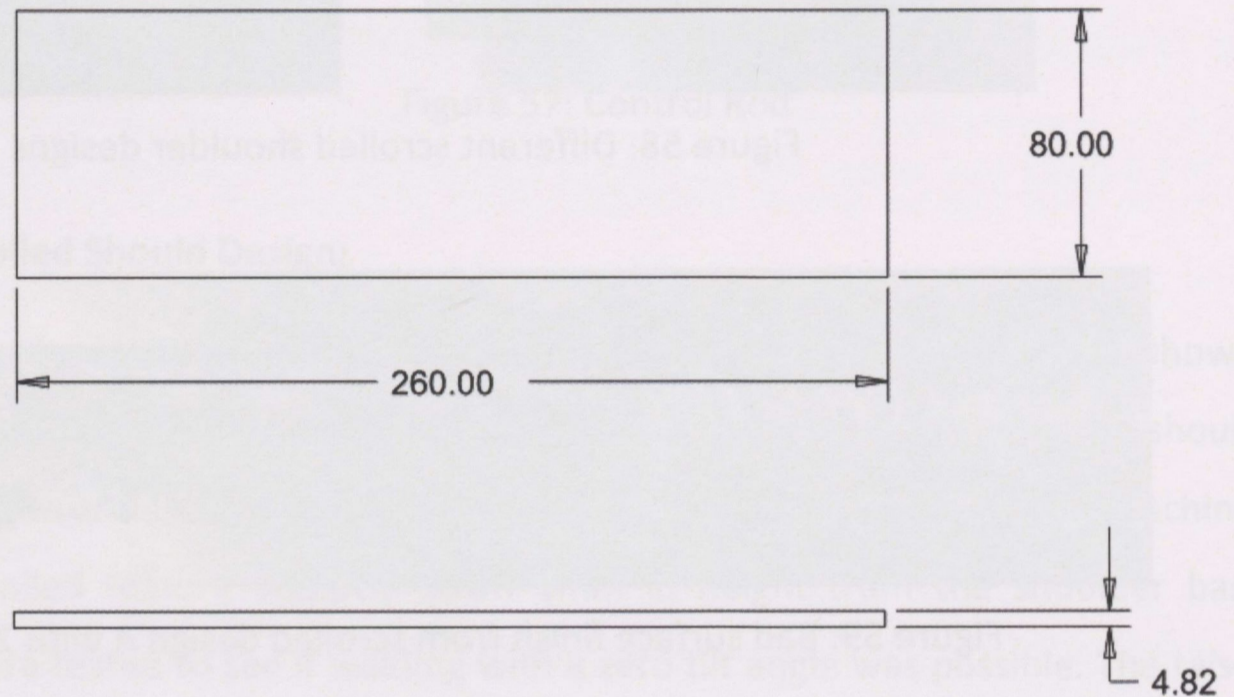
Aluminium 2024-T3 workpiece plate dimensions
